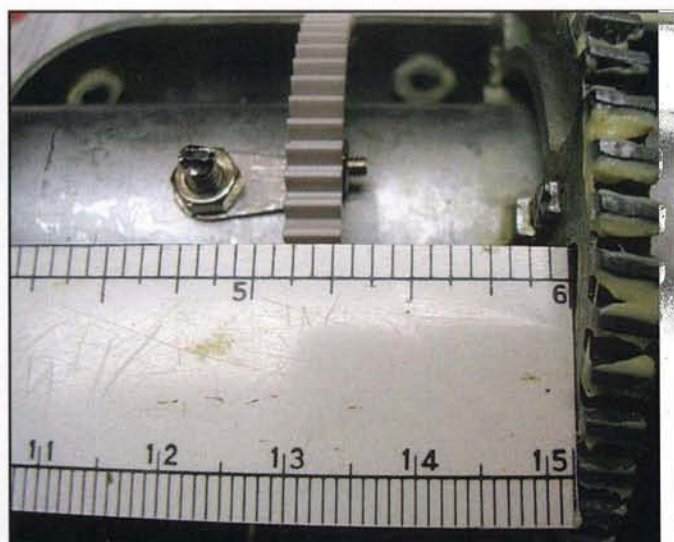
Close-up showing where the new plastic gear is located on the EL rotator collar.
